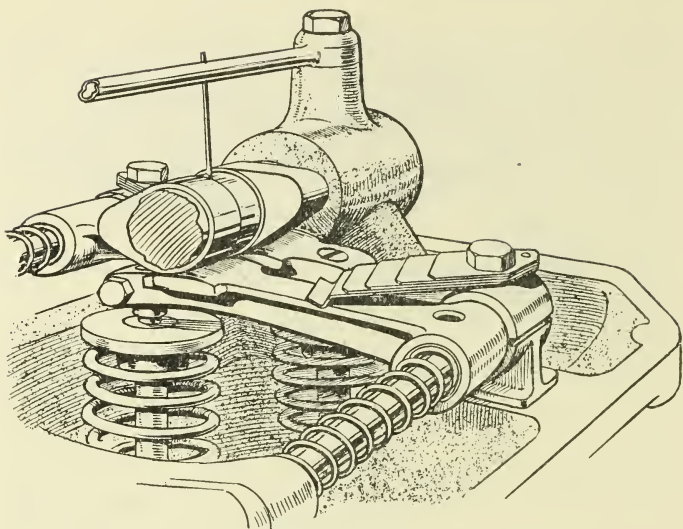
THE BEARDMORE ENGINE THAT EMPLOYS PIVOTED LEVERS WITH AN OFFSET CAMSHAFT TO OPERATE THE VALVES
